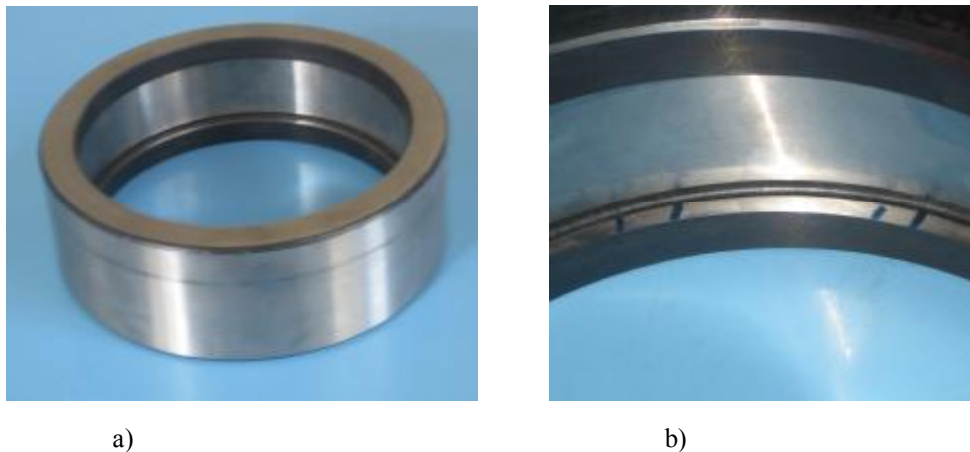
Tested sample of steel bearing cage (a), detail with place of two cracks (b).
